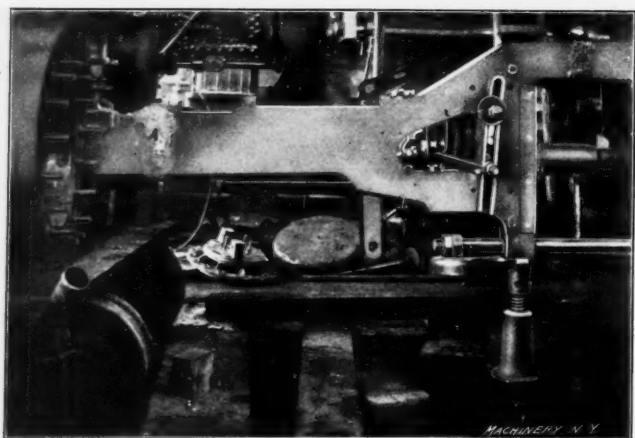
New Section of Frame Welded to the Old by the Thermit Process
